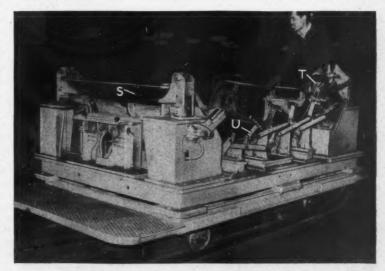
One of the trolley-mounted jigs for the final welding operations on roof sub-assemblies. Manually-operated and pneumatic clamps are used, and the air supply is connected by means of a quick release coupling which is provided at the loading station
